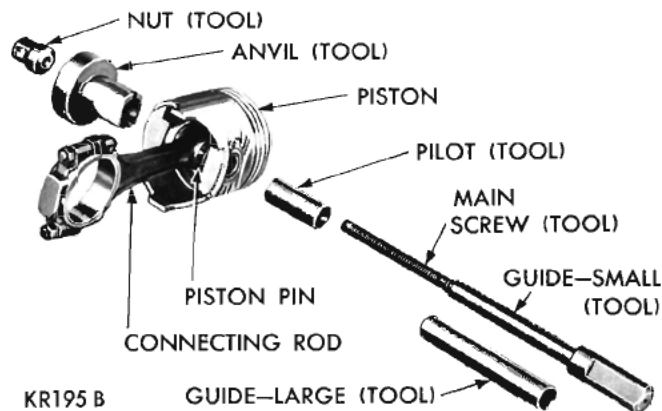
Tool Arrangement for Removing Piston Pin Tool C-3684
